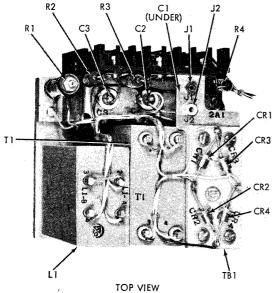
Power Supply PP-2796/WRA-3, Unit 2, Test Points and Parts Location (Sheet 3 of 3)
